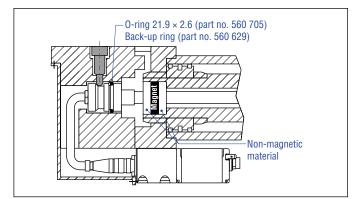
Mounting example of pressure fit flange »S« and sensor electronics with side cable entry
